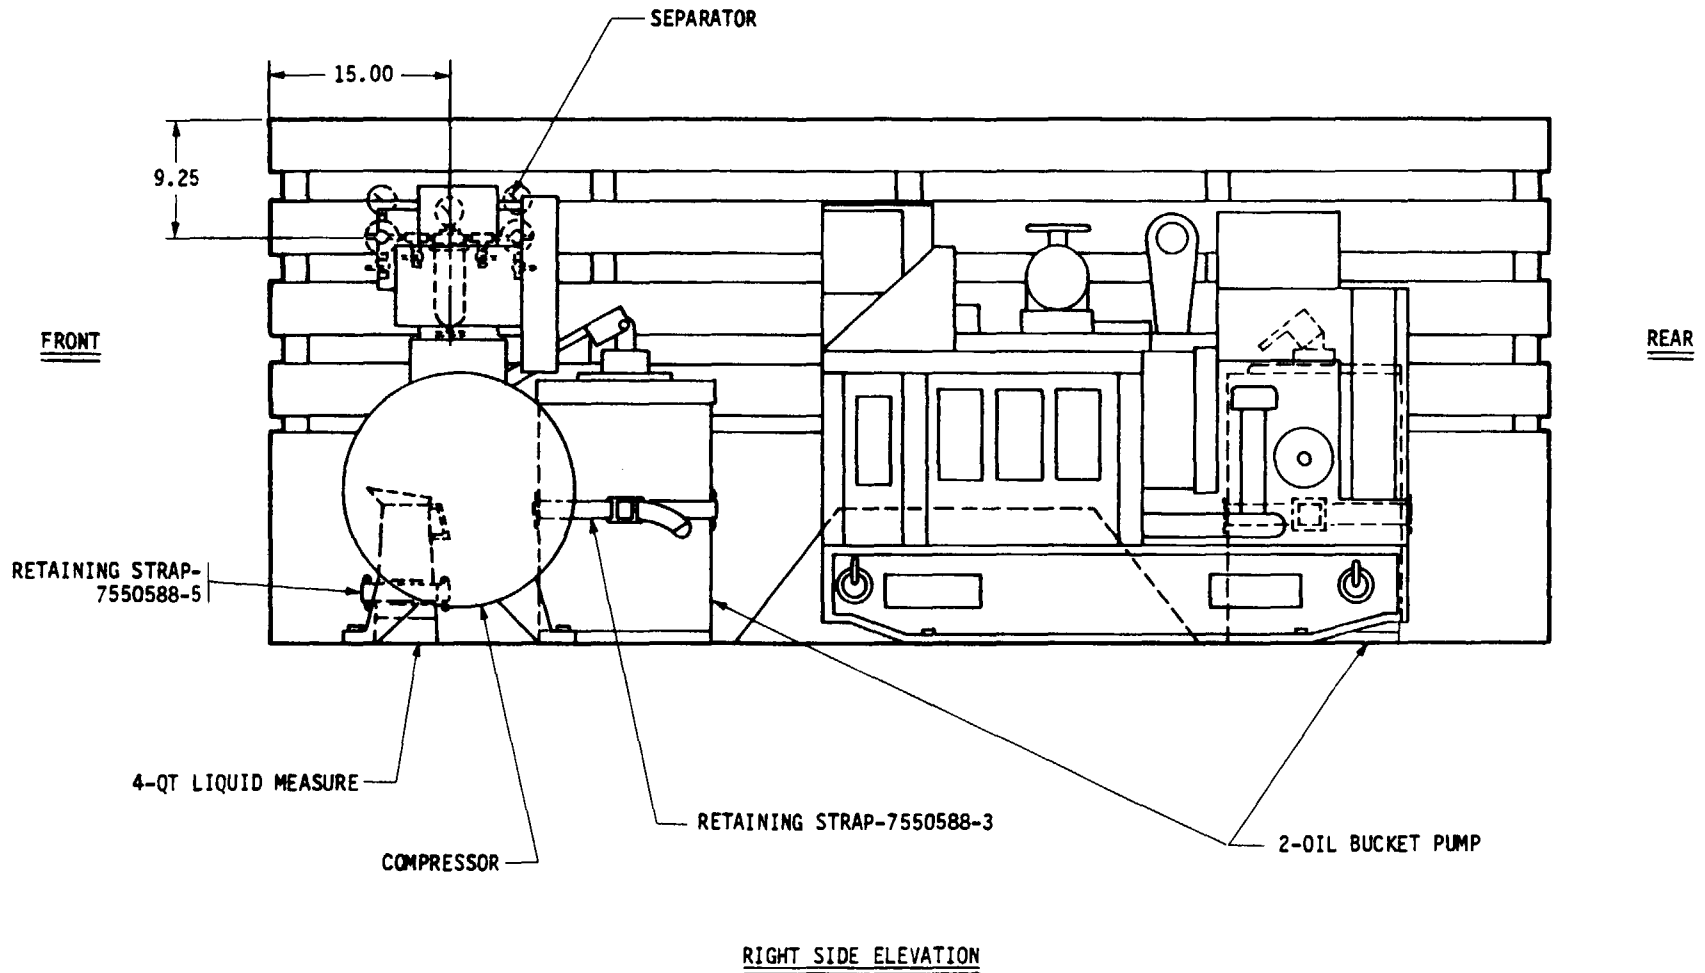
Components to be Mounted, Unit 4, M105A2, Right Side Elevation.
